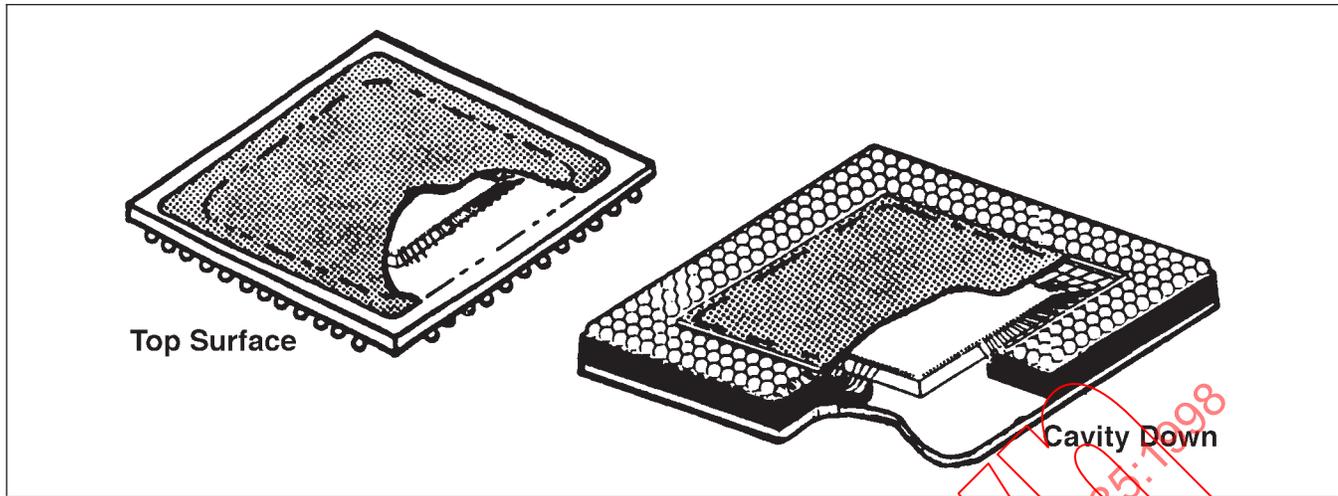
Ball Grid Array Devices Furnished with Die Mounted on Top Surface and Bottom Side for Cavity Down
